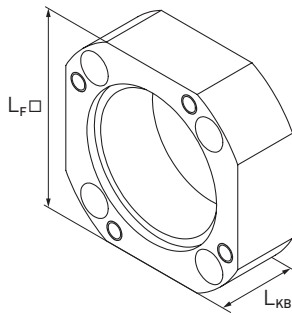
Coupling housing KB for linear modules HM-B and cantilever axes HC
